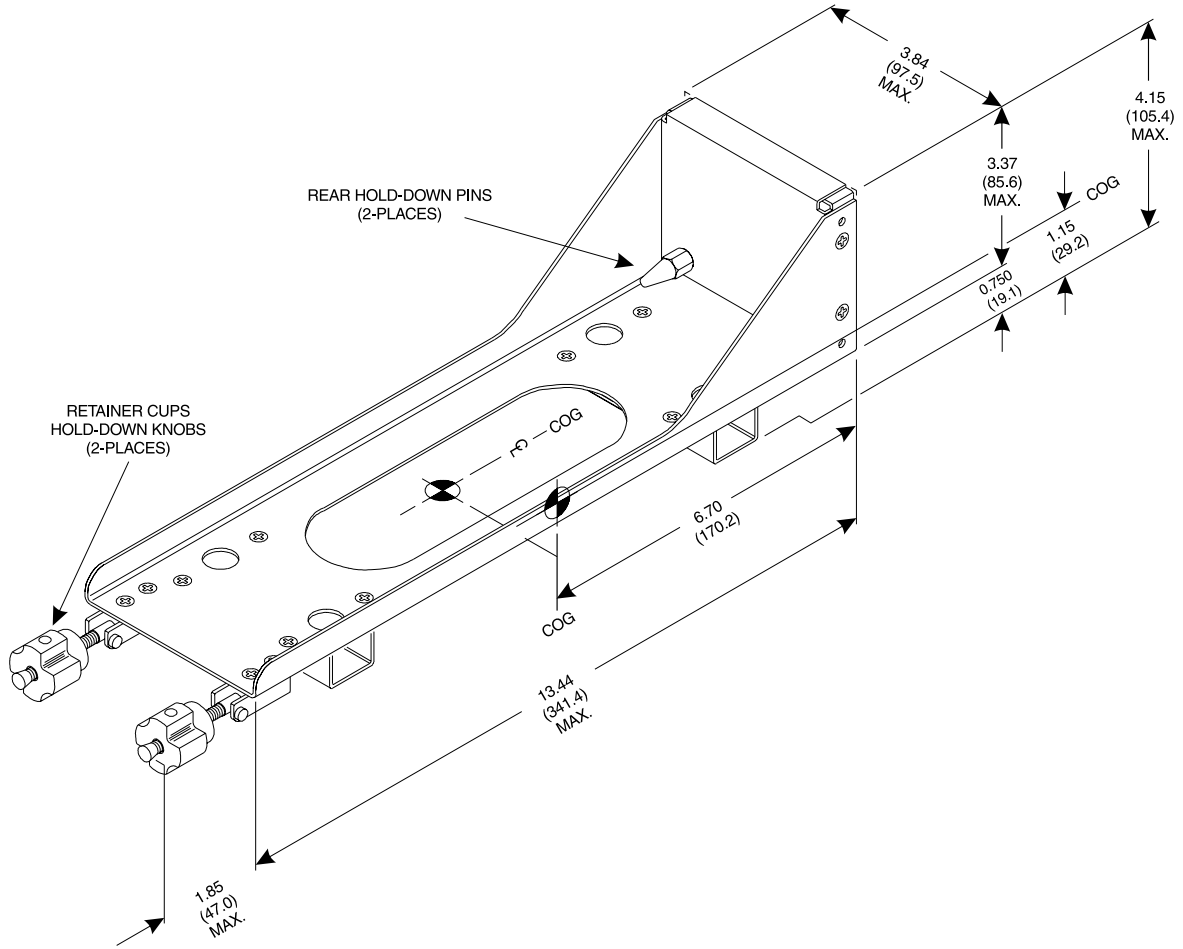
Standard TRC Mounting Tray (P/N 805-10870-001)
